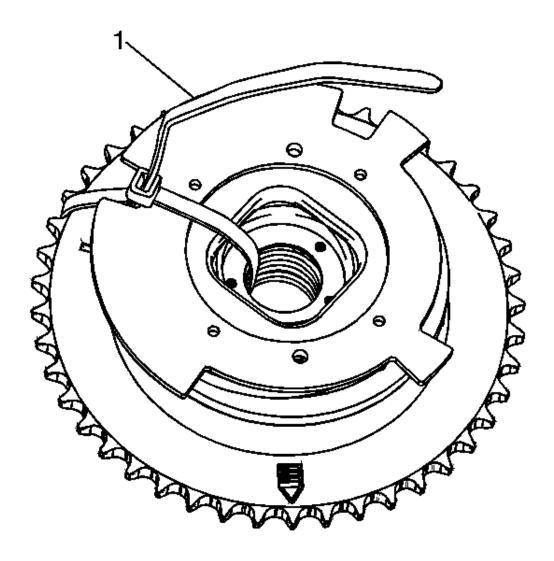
View Of Tie Strap Through Center Of Actuator Courtesy of GENERAL MOTORS CORP.
